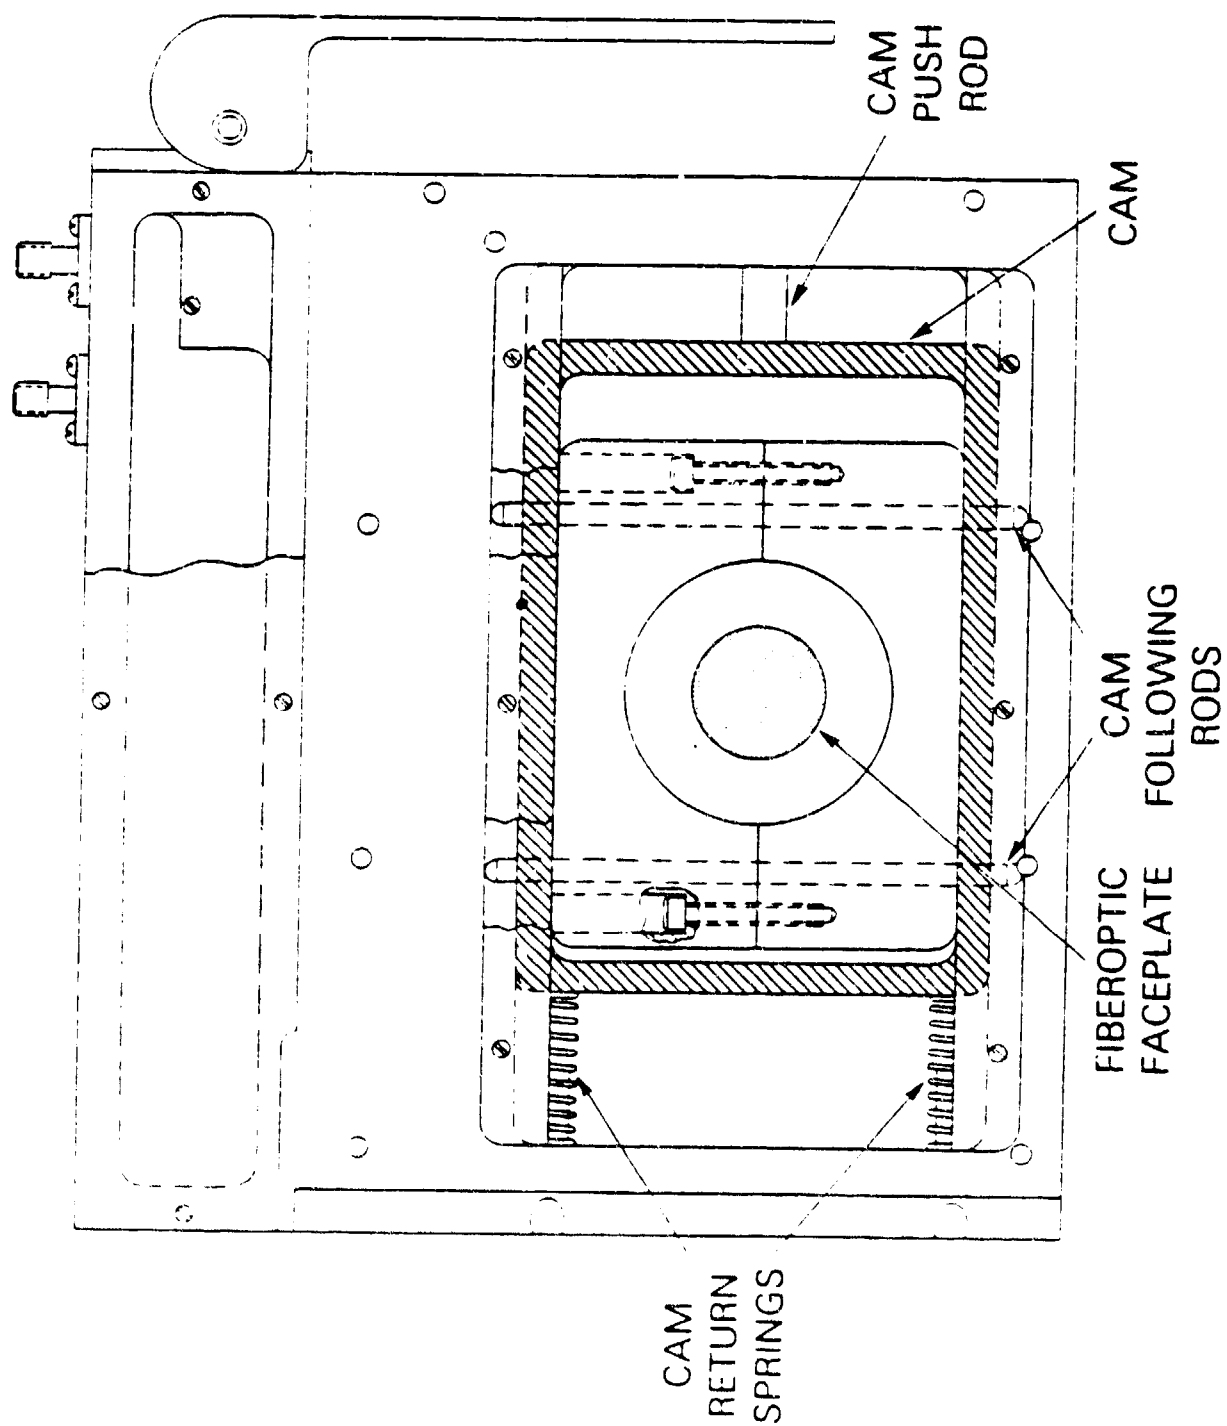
Assembly drawing of the intensifier tube housing and transport mechanism viewed from the film side
